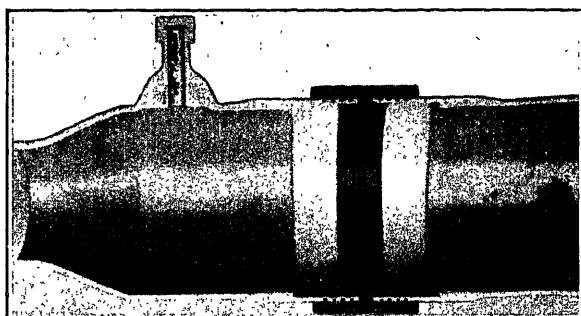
CROSS-SECTION OF ONE-HALF OF 66-KV. JOINT SLEEVE WITH H & T INSULATING SLEEVE
